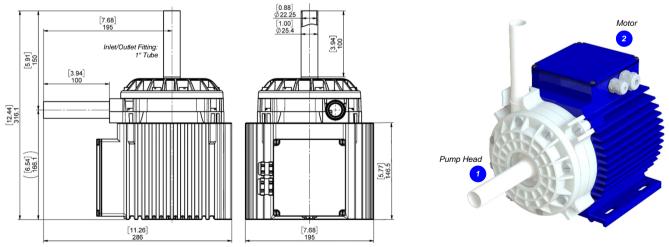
Dimensions of motor LPM-2000.12 with pump head LPP-2000.16 Note 1: Non-tolerated dimensions are for reference only.
